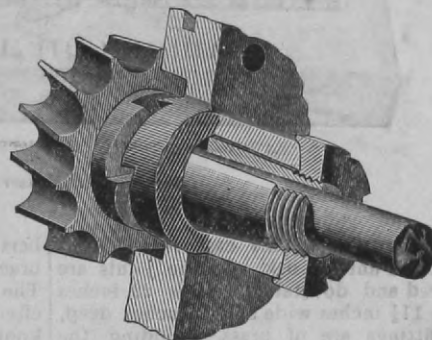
Pinion, Clutches, Box, Nut and Section of Reel Shaft.
